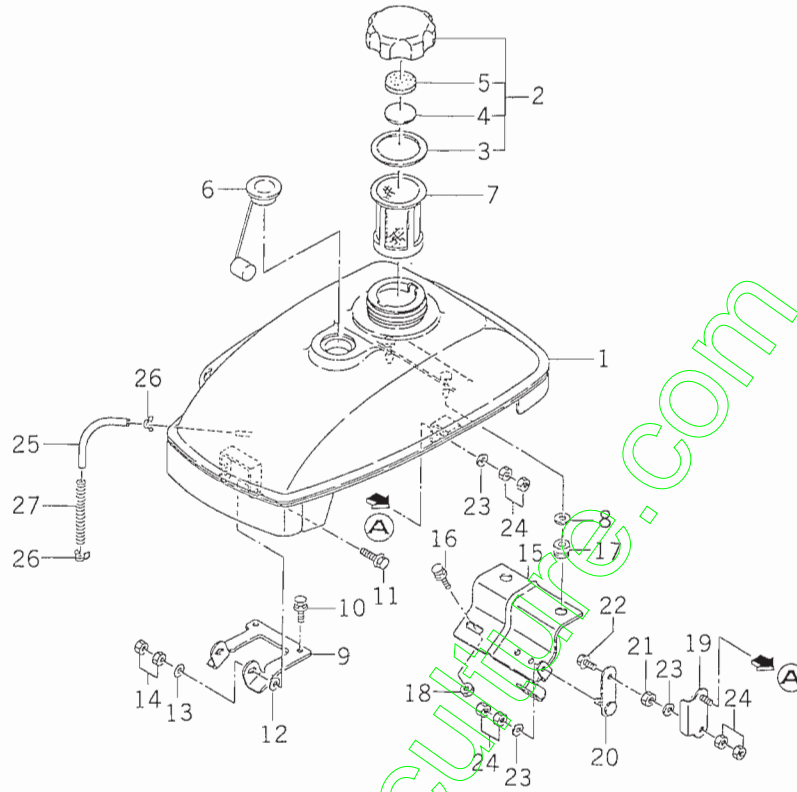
FUEL TANK (55) SYSTEM (SA570 TYPE)
